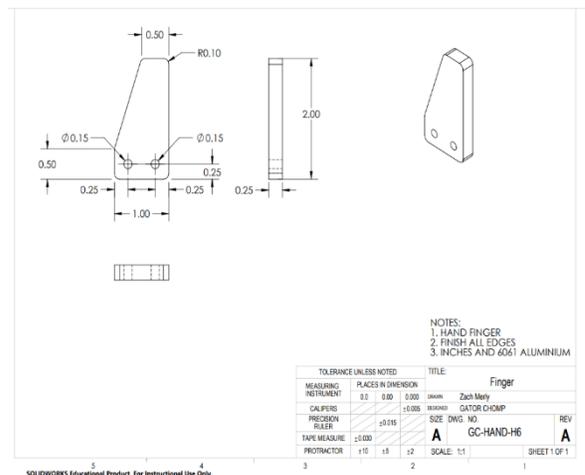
This is a part drawing of the fingertip of the robotic hand. Used as an example of the part drawings that will be used for manufacturing.
